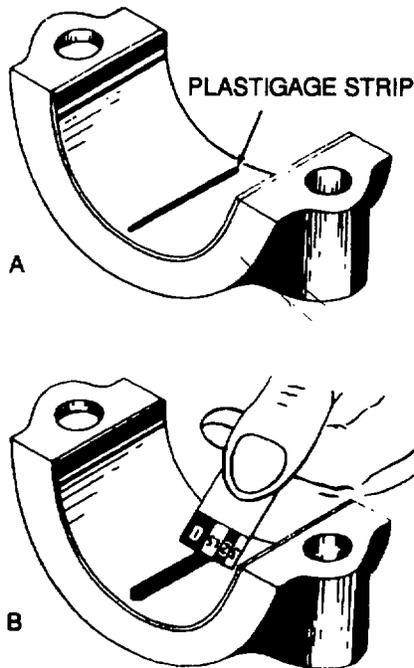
Using Plastigage to Determine Bearing Clearance
